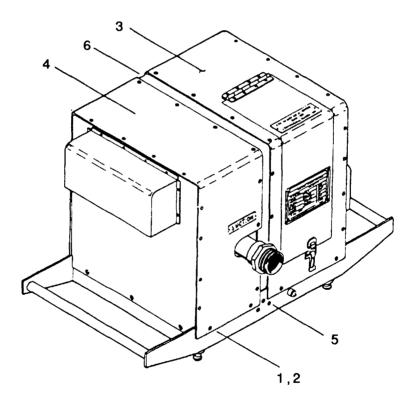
Replace/Inspect Sound Enclosure Assembly
